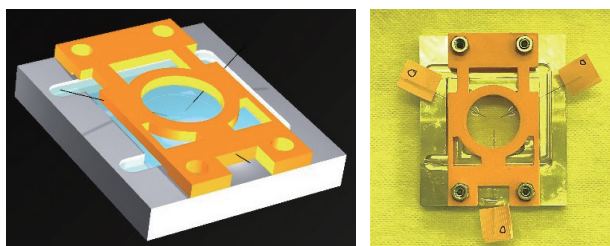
A 3D drawing (left) and picture (right) of the PDMS sample holder in a mold.
